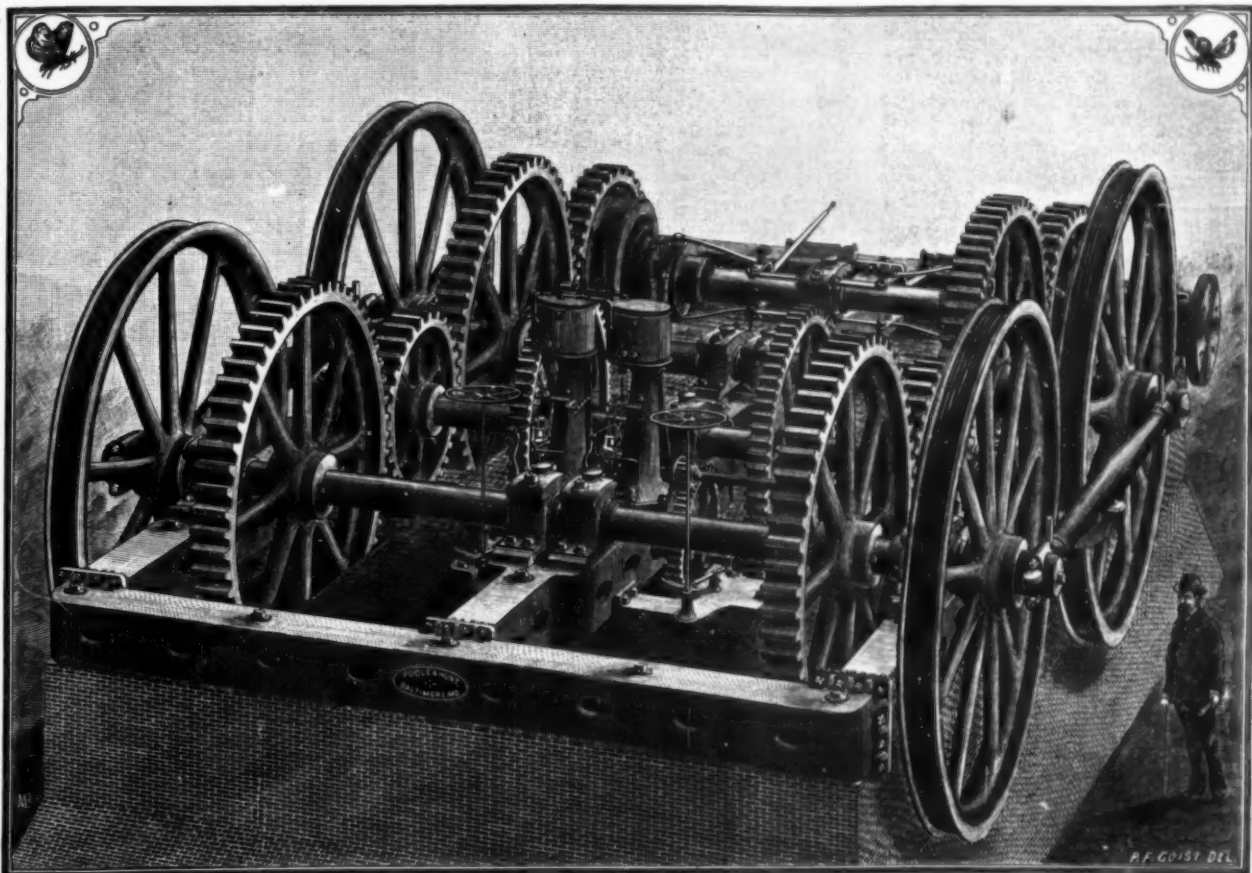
NEW YORK CITY CABLE RAILWAY.—ENLARGED VIEW OF ONE SECTION.
